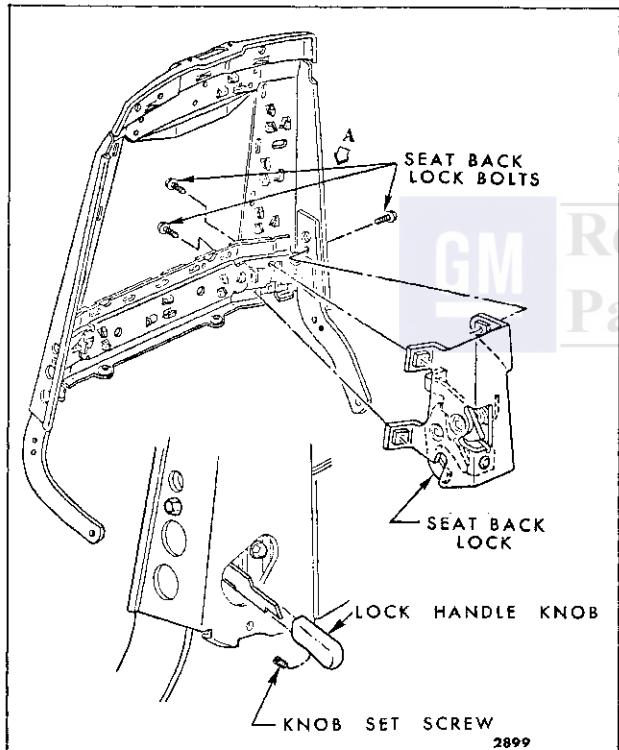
Front Seat Back Lock - "F & Z" Standard Bucket Seats
